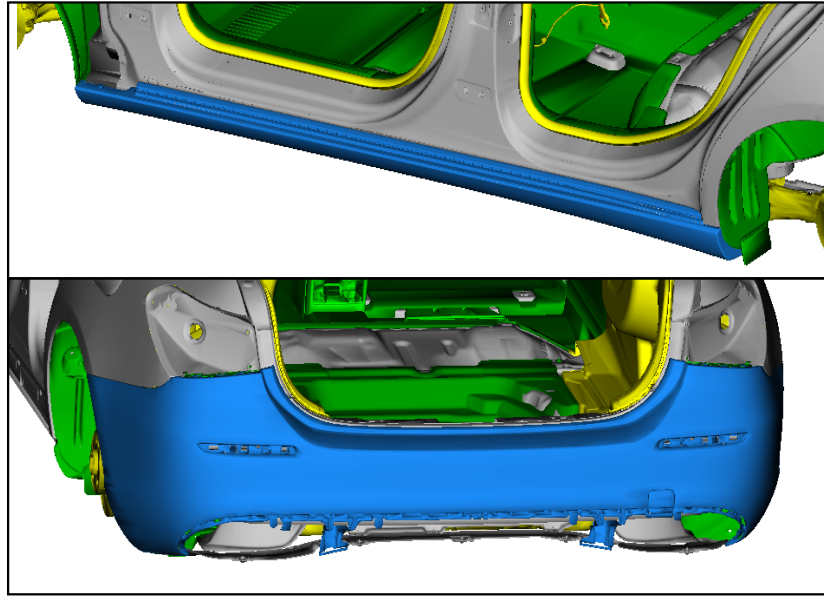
Two assembled parts where the IMMP motion planner could not find a feasible disassembly path for the NEAR planning phase.
